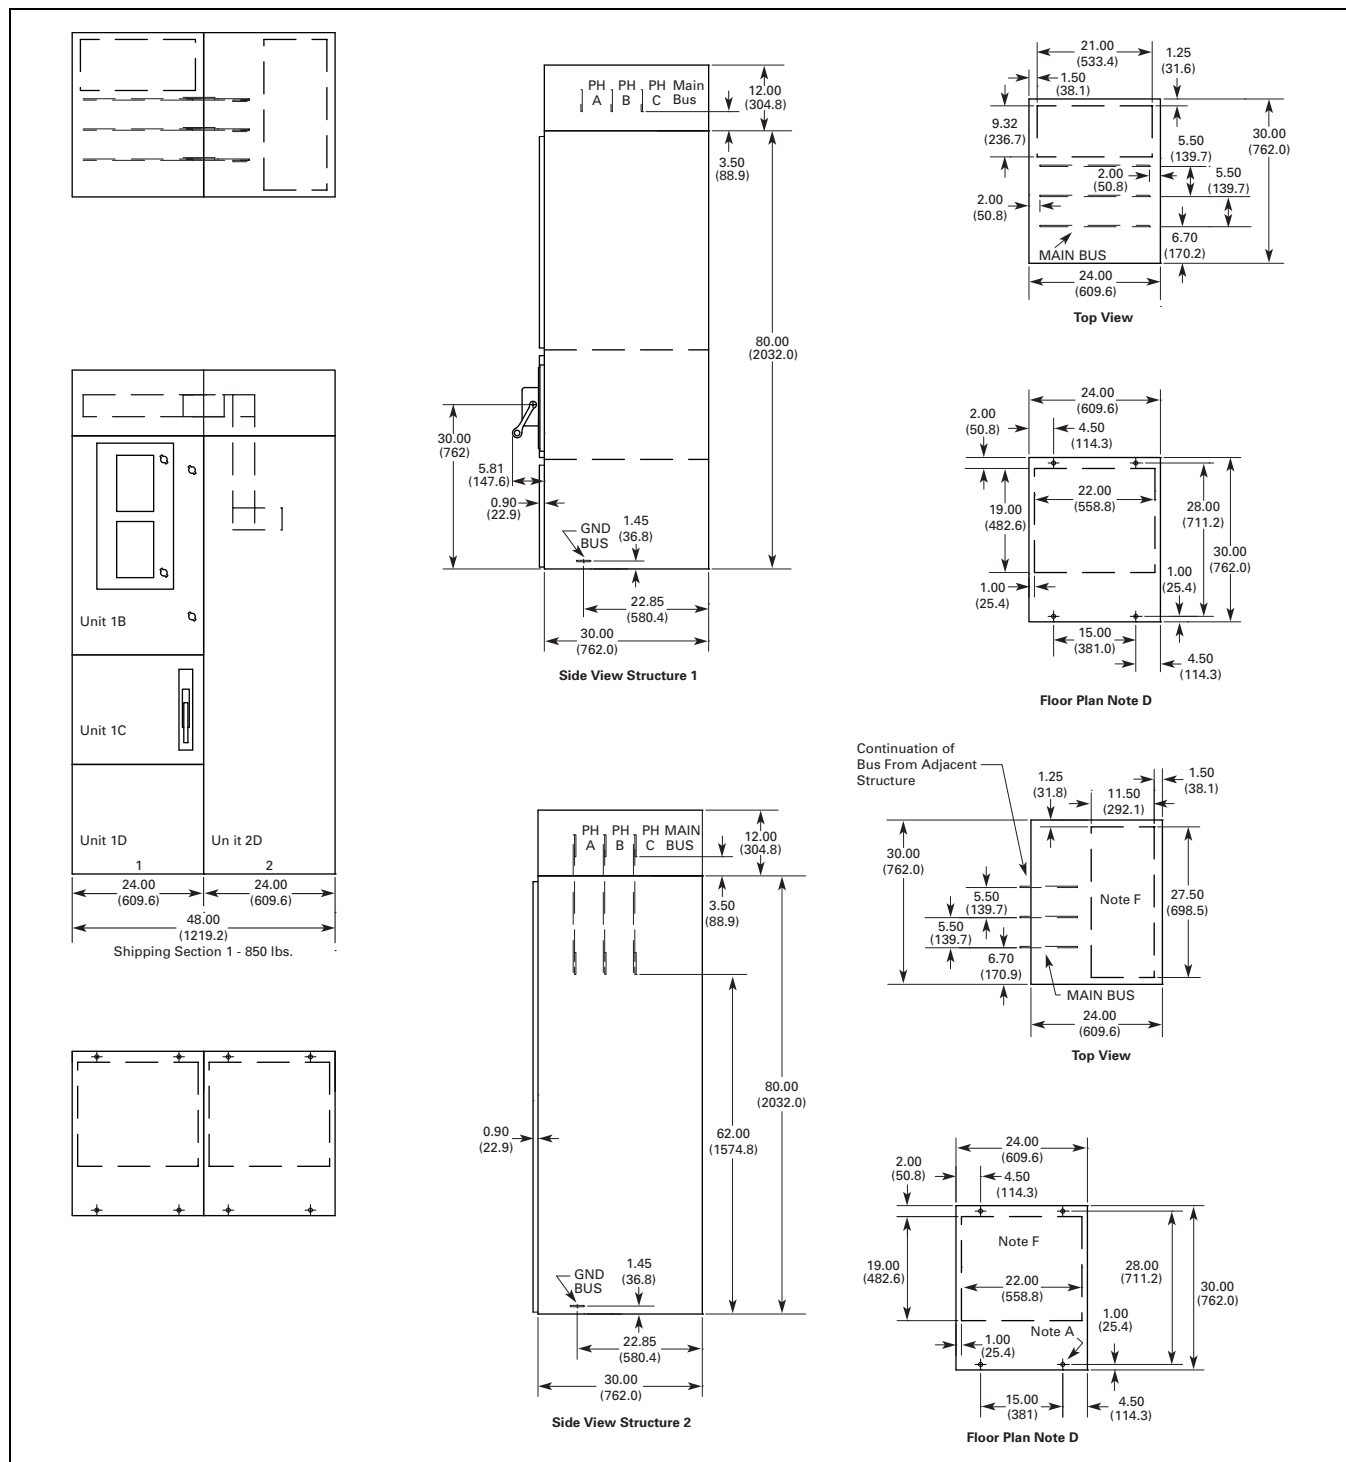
24.00-Inch (609.6 mm) Incoming Cable Section with 24.00-Inch (609.6 mm) Metering Section (for Right End of Lineup)
